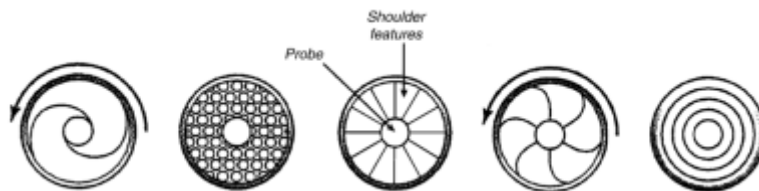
Different type of FSW tool shoulder profiles [1].
